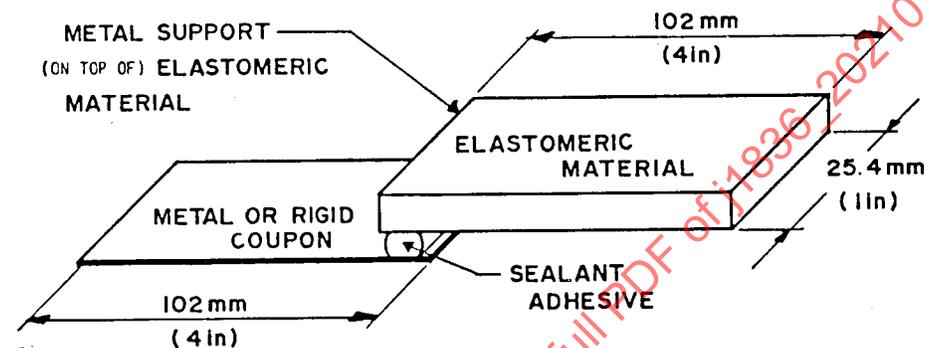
THREE DIMENSIONAL VIEW OF OVERLAP SHEAR TEST SPECIMEN
